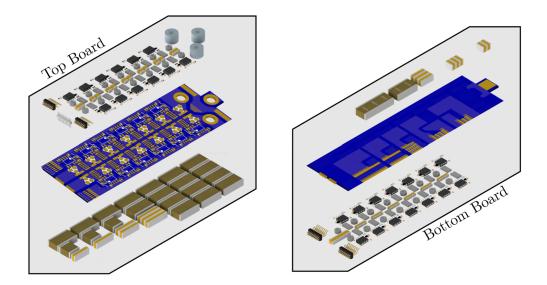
Component placement for dual-PCB design. The Top Board has active circuitry on the top and passive components on the bottom. The Bottom Board is mirrored.
